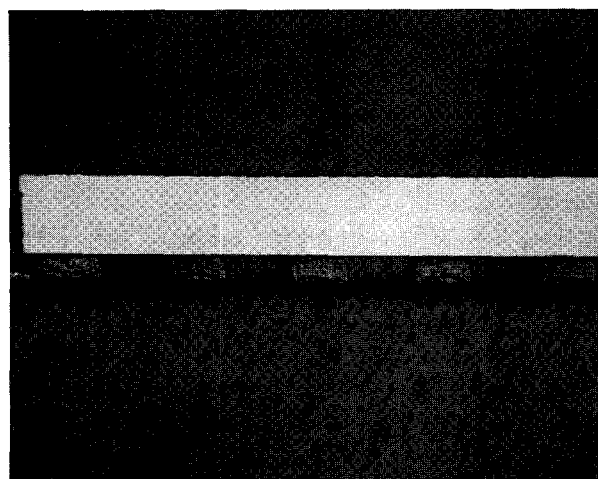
Multiterminal chip attached to module with limited-wetting electrodes on module (75X).
